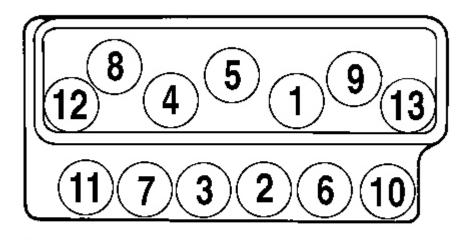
Cylinder Head Bolt Tightening Sequence Courtesy of GENERAL MOTORS CORP.
